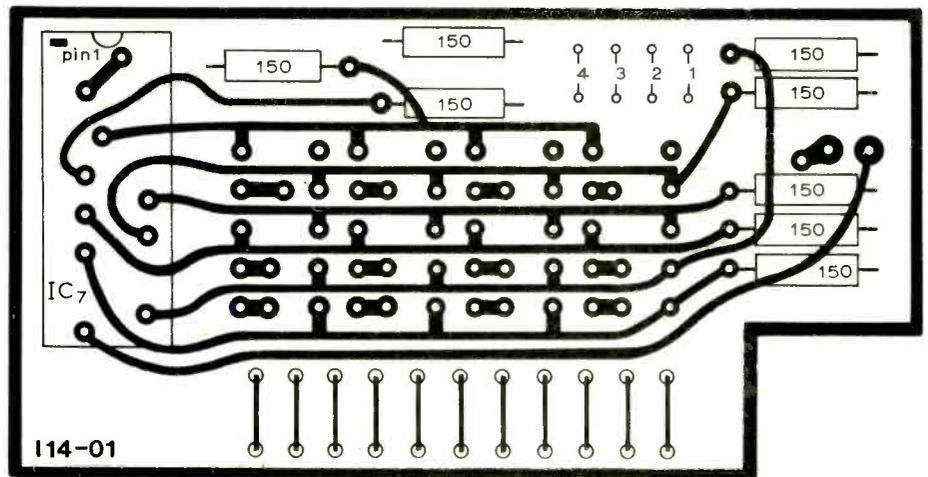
Component layout and connecting tracks on the rear of the display p.c. board.
